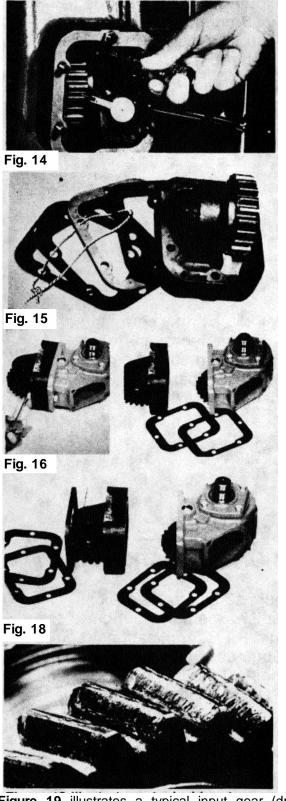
illustrates a typical input gear (driven gear) in a P.T.O. that was mounted too deep-insufficient backlash. Extreme heat turned the gear blue and resulted in gear and bearing failure.
